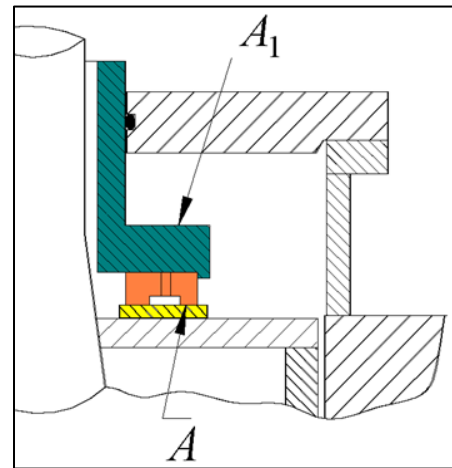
Axial Seal Face Balance Ratio (A_1/A)
